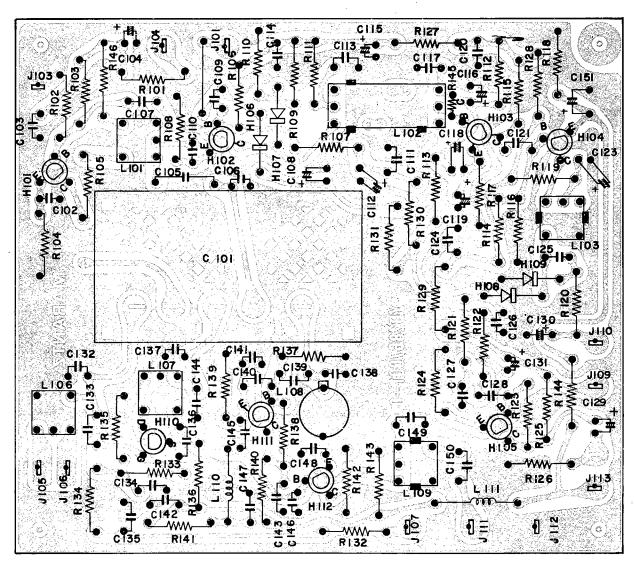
FM Front End and AM Tuner Assembly P100 Component Locations
